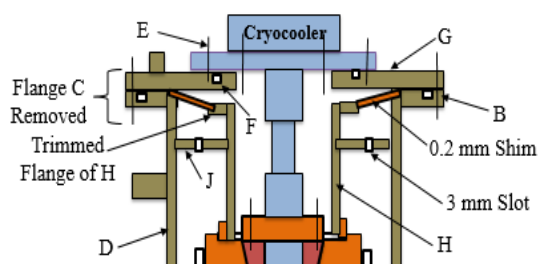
Schematic diagram of modified sock assembly with 0.2 mm thick SS-304 shim.
